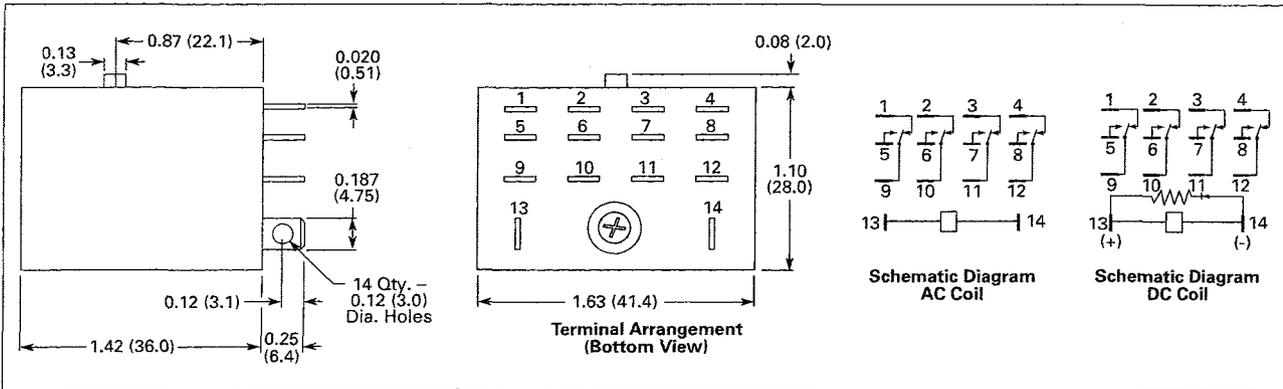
D7PR43 — Approximate Dimensions in Inches (mm)
